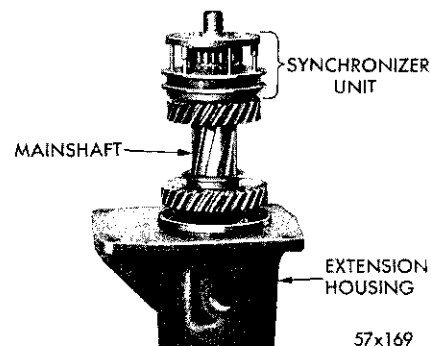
Synchronizer Unit Assembled on Mainshaft
